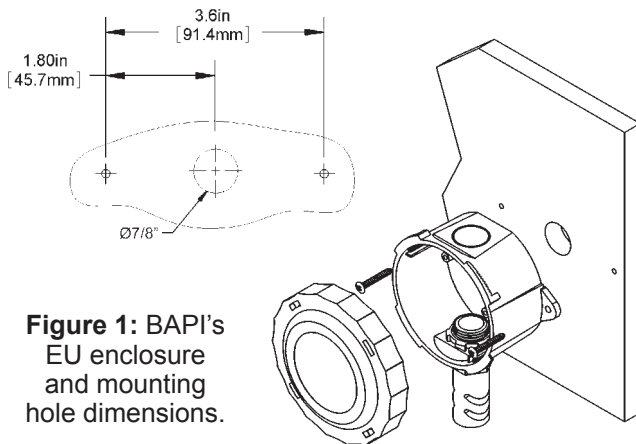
BAPI's EU enclosure and mounting hole dimensions.
